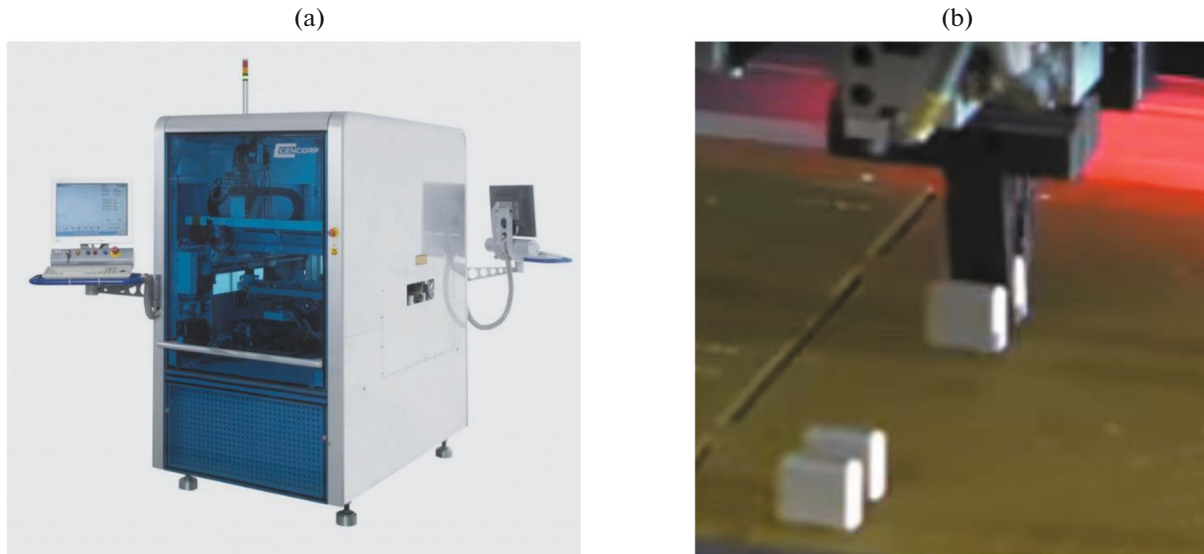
(a) Universal machine and (b) radial lead component mounting.
